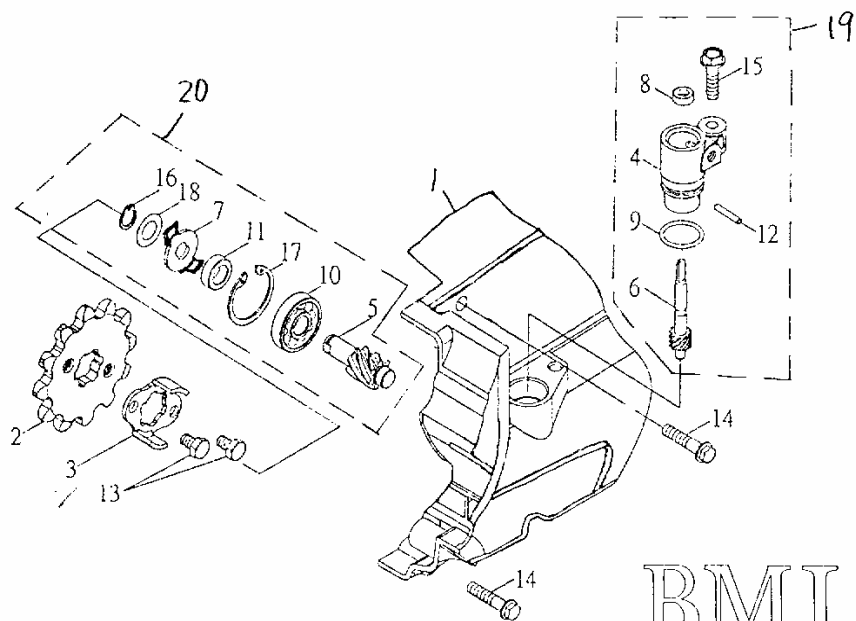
GEAR,SPEEDOMETER 速度表齒輪
